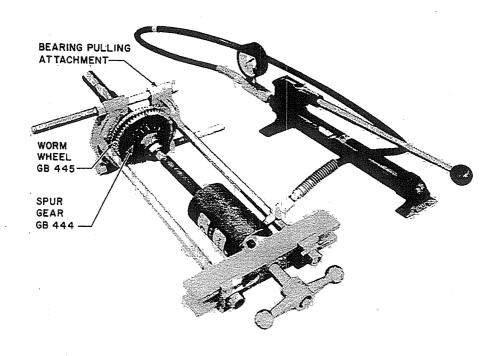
4 to 1 Shaft, Removal of Worm Wheel GB445 and Spur Gear GB444
